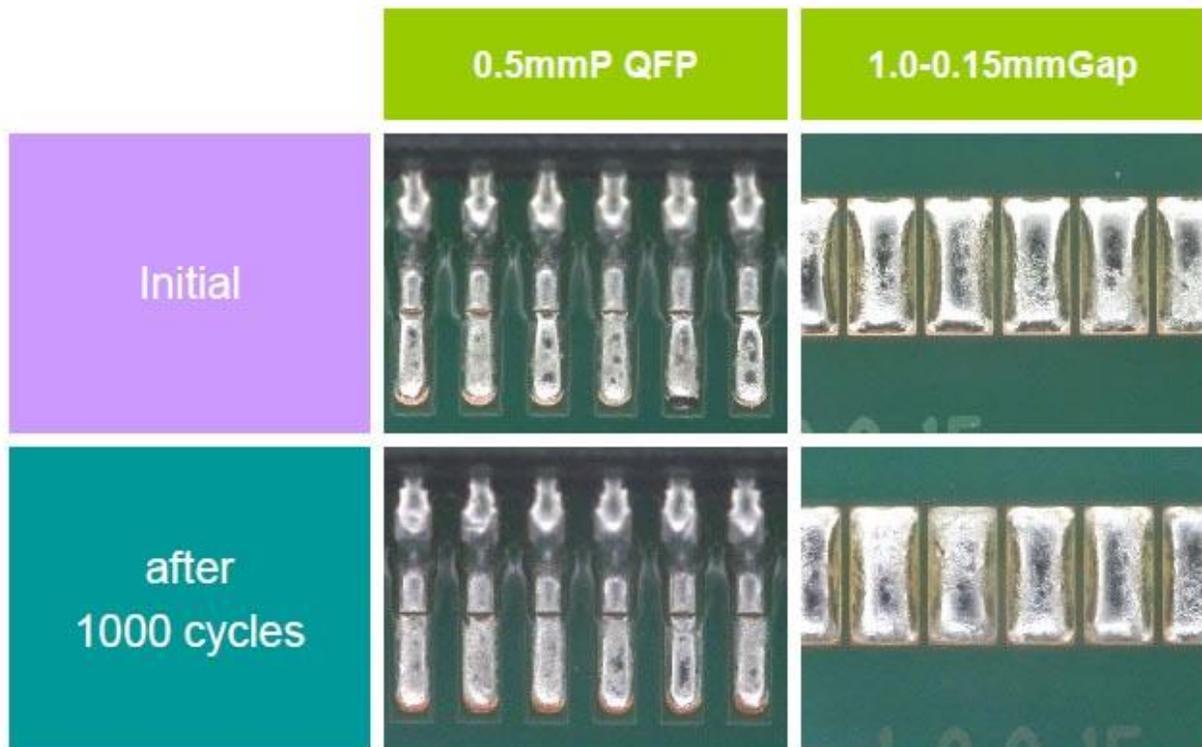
Cracking test on reflowed crack-free Paste A before and after thermal cycling on soldered 0.5mm pitch QFP component and 1mm wide pads with 0.15mm gaps.
